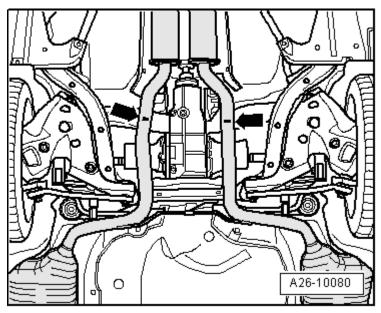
Separating Exhaust Pipes At Separating Point Using Chain Pipe Cutter VAS 6254 At Right Angle
